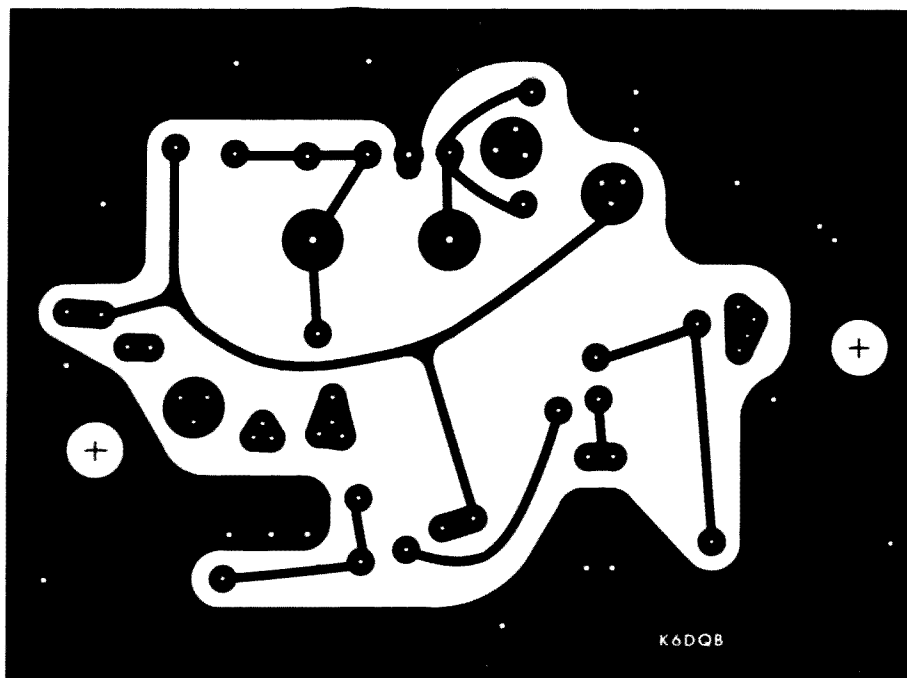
Copper foil side of the printed circuit board for the Novice converter.
